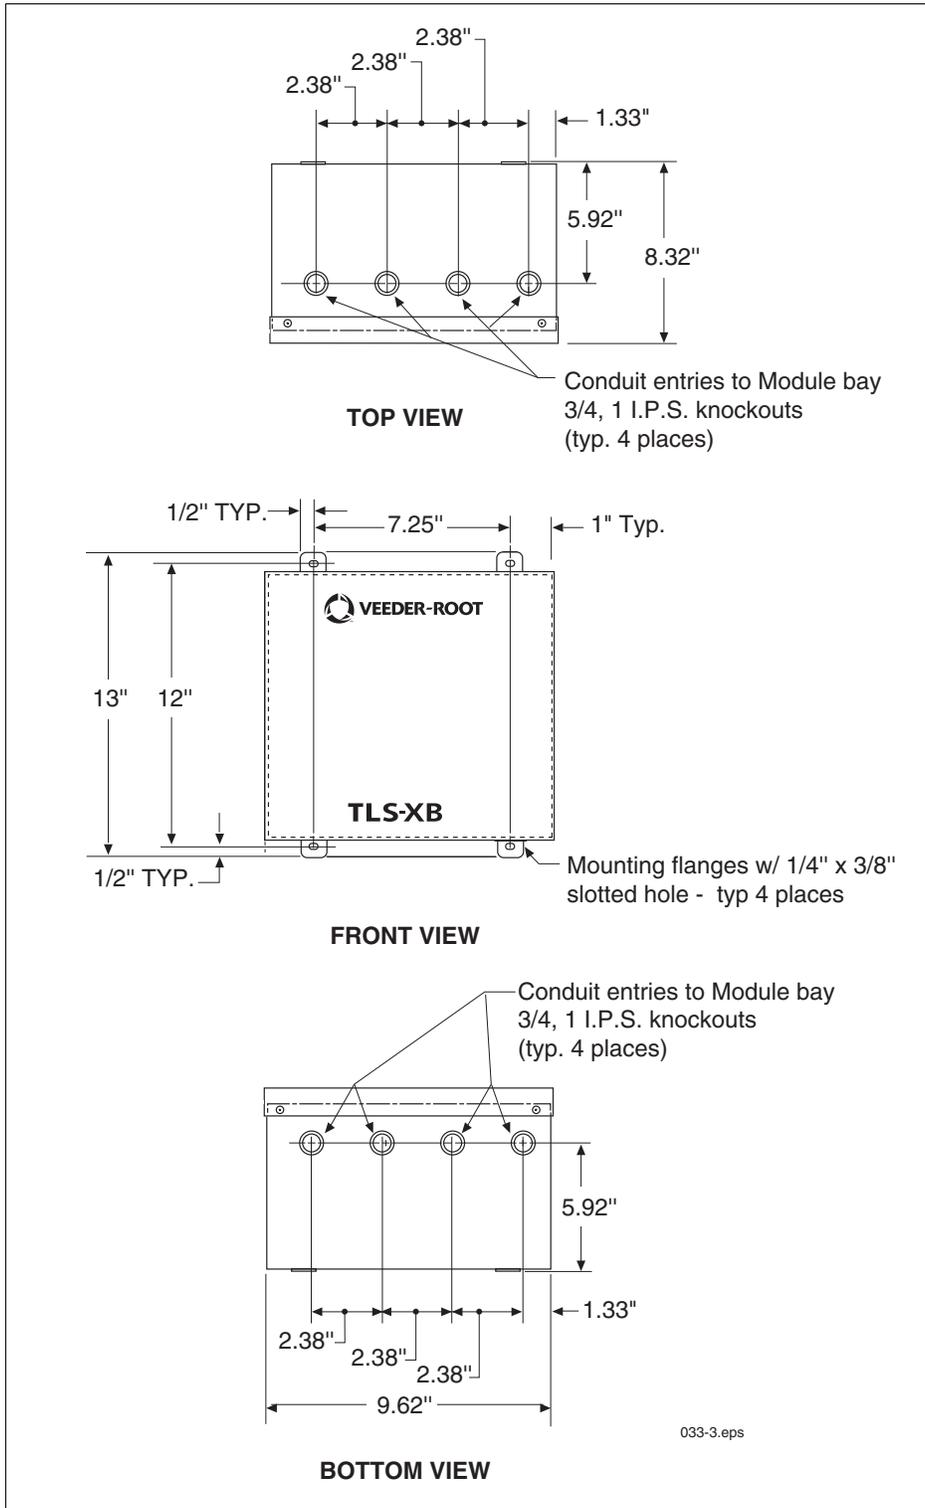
TLS-XB Console Dimensions and Designated Conduit Knockouts
